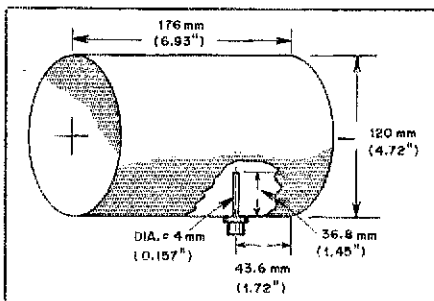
The tubular radiator for 1691 MHz consists of a metal cylinder with one end open. This end faces the dish. The rod element should be soldered directly to the type-N connector. The connector should have a provision to slide 5 mm (0.197 in.) forward and backward to find the best position.
